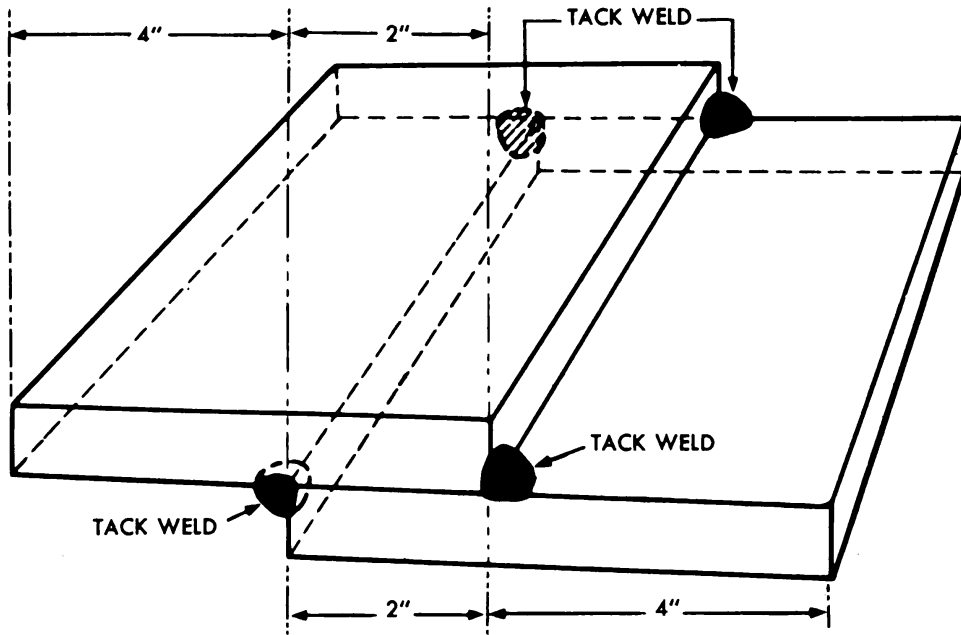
Intermittent Spacing in Fillet Welds
